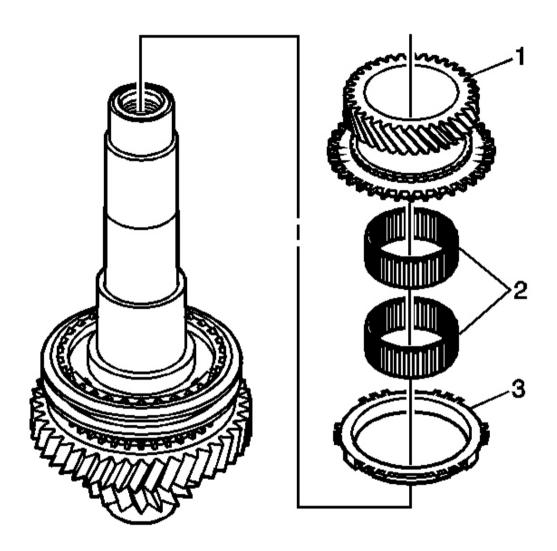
5th Gear, Blocking Ring & Two Caged Needle Bearings Courtesy of GENERAL MOTORS CORP.
